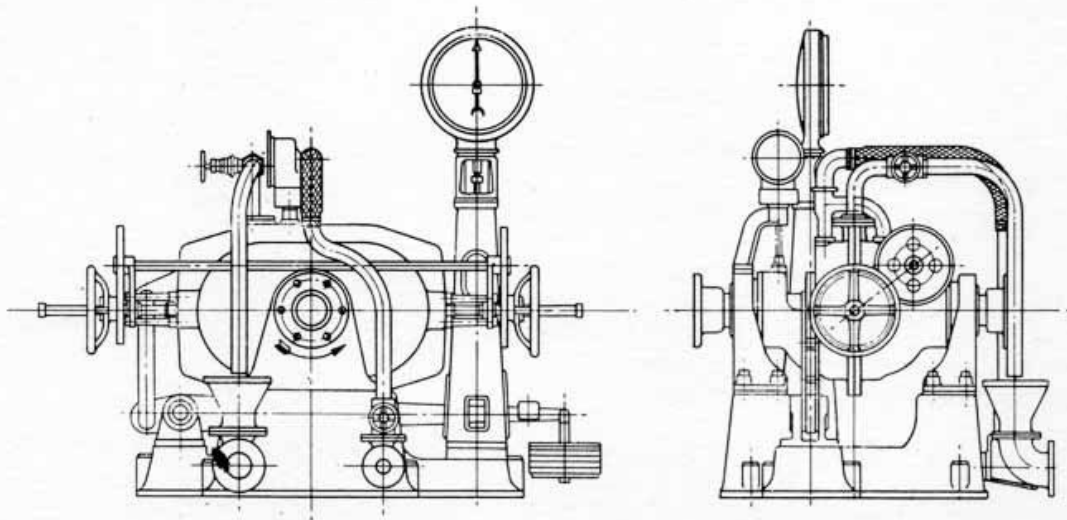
Side and end arrangements of engine dynamometer. (Froude Patent)
